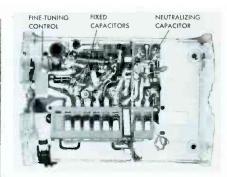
Printed Wiring Board of the Neutrode Tuner.
